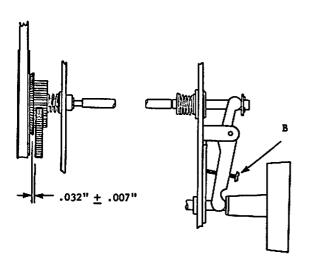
SPROCKET ADJUSTMENT (DISENGAGED)
